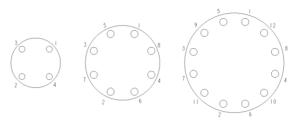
FLANGE BOLT TORQUE SEQUENCE
